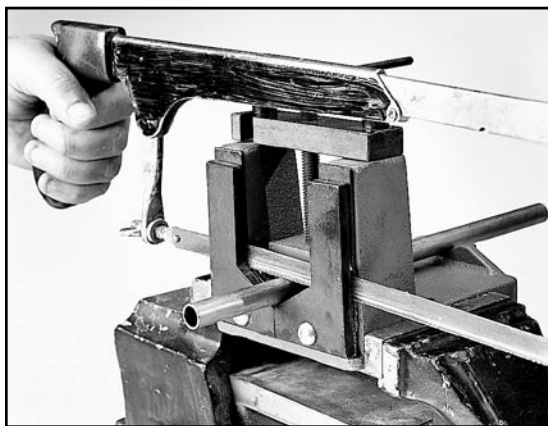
Parker's Tru-Kut Sawing Vise used with hacksaw
